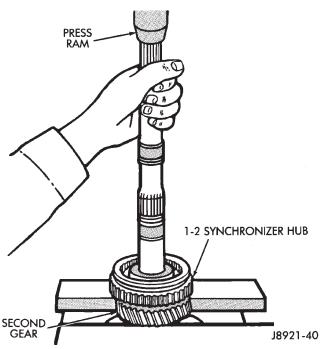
Remove Second Gear, Reverse Gear, And 1–2 Synchronizer
